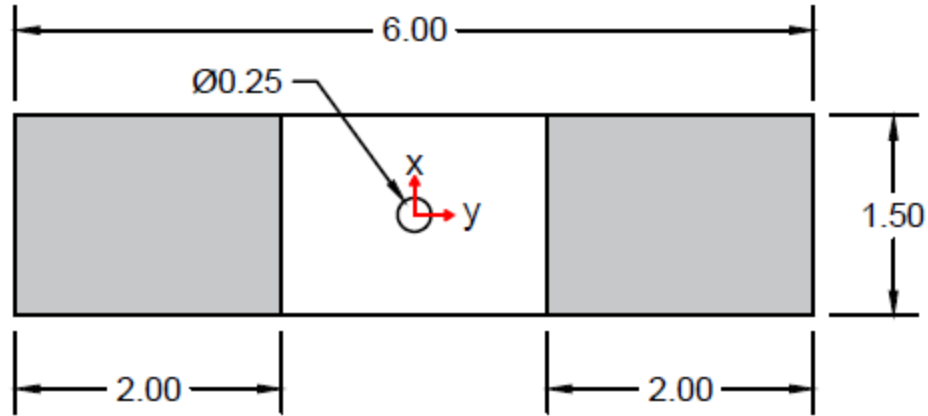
Typical specimen geometry and layout (all dimensions in inches)
